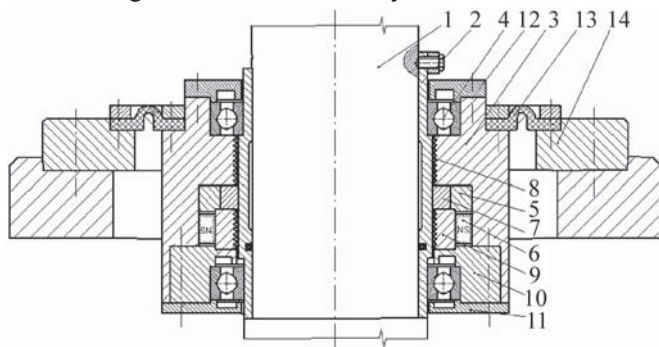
Magnetic fluid seal for a vertical shaft with large axial and radial runout: 1 – shaft; 2 – magnetic sleeve; 3 – casing; 4 – rolling bearing; 5 – non-magnetic ring; 6 – permanent magnet; 7 – felt ring; 8 – magnetic fluid; 9 – pole shoe; 10 – non-magnetic retaining ring; 11 – lower cover; 12 – upper cover; 13 – elastic bellows; 14 – flange
